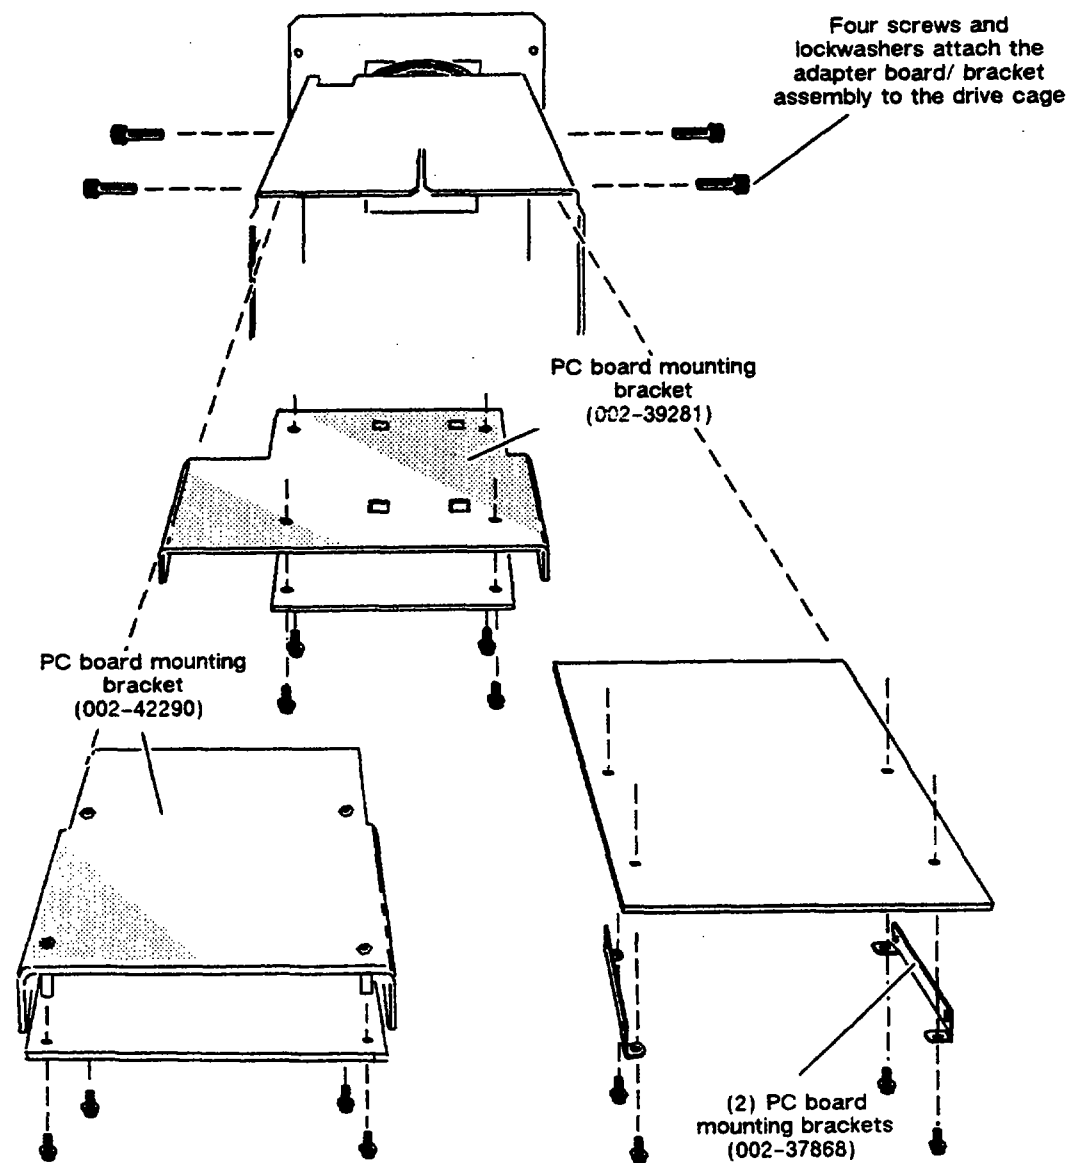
Attaching an Adapter Board to a Bracket, and Mounting Board/Bracket Assembly in a PHU
